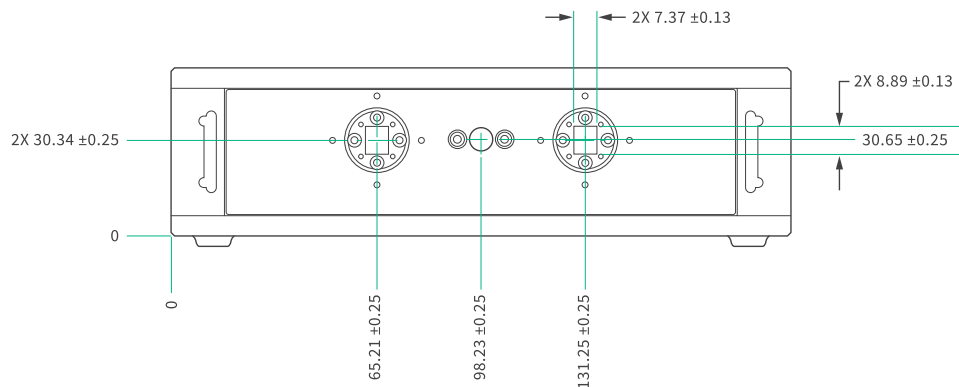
mmRH-5592 Mechanical Dimensions, Front View
